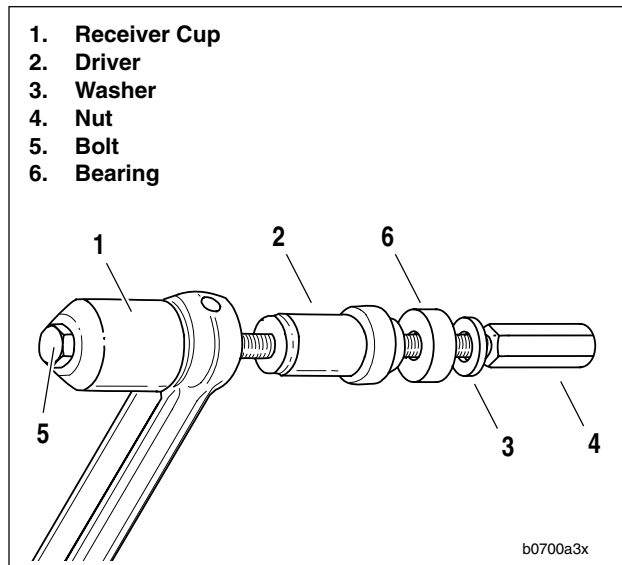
Piston Pin Bushing Tool Assembly for Bushing Removal
